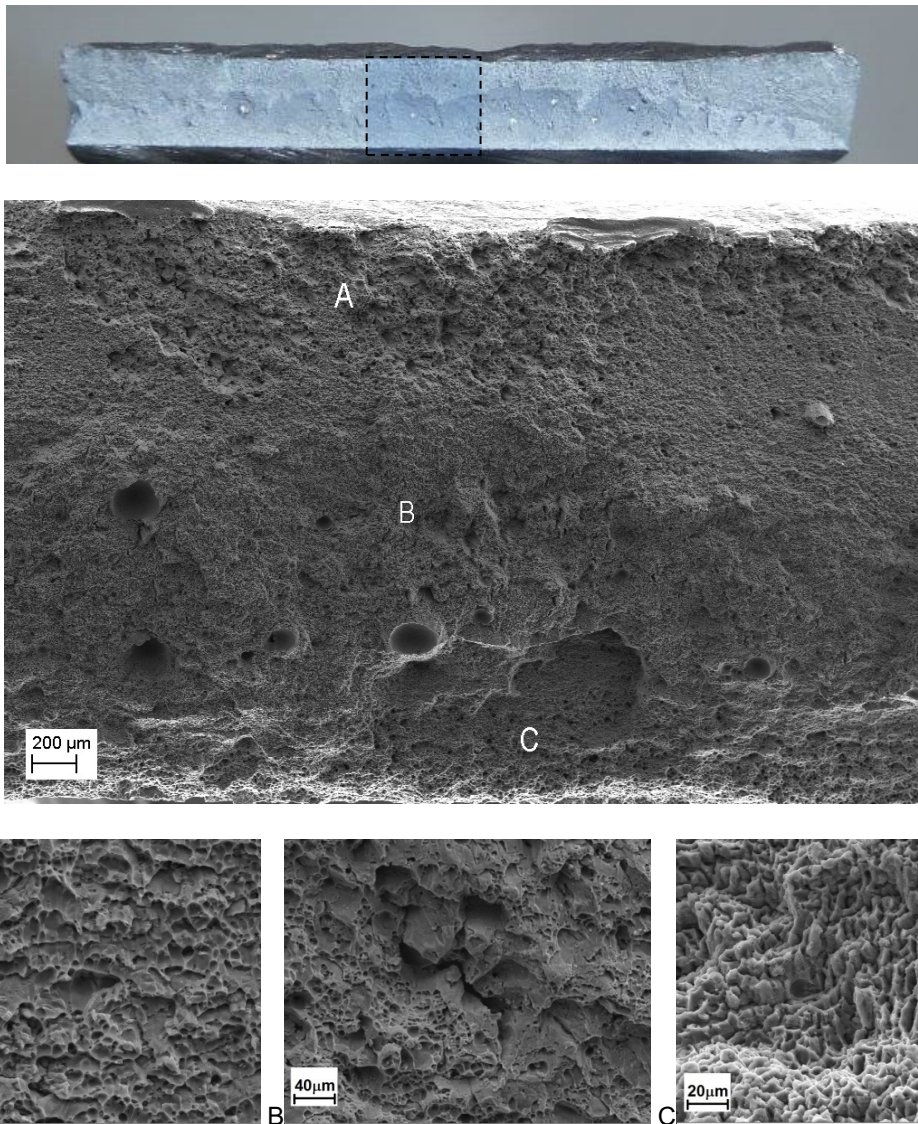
Fracture surface of transversal tensile test. From top to bottom: optical image of the fracture; SEM image of the highlighted part of the section; Magnifications of the surface parts marked with letters A, B, C.
